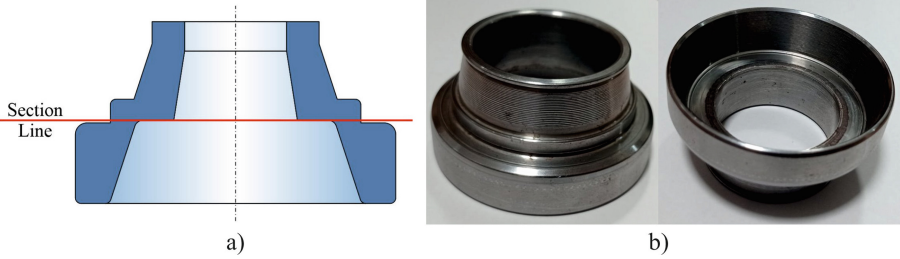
The continuous design of the workpiece of two rings: a) scheme; b) prototype.
